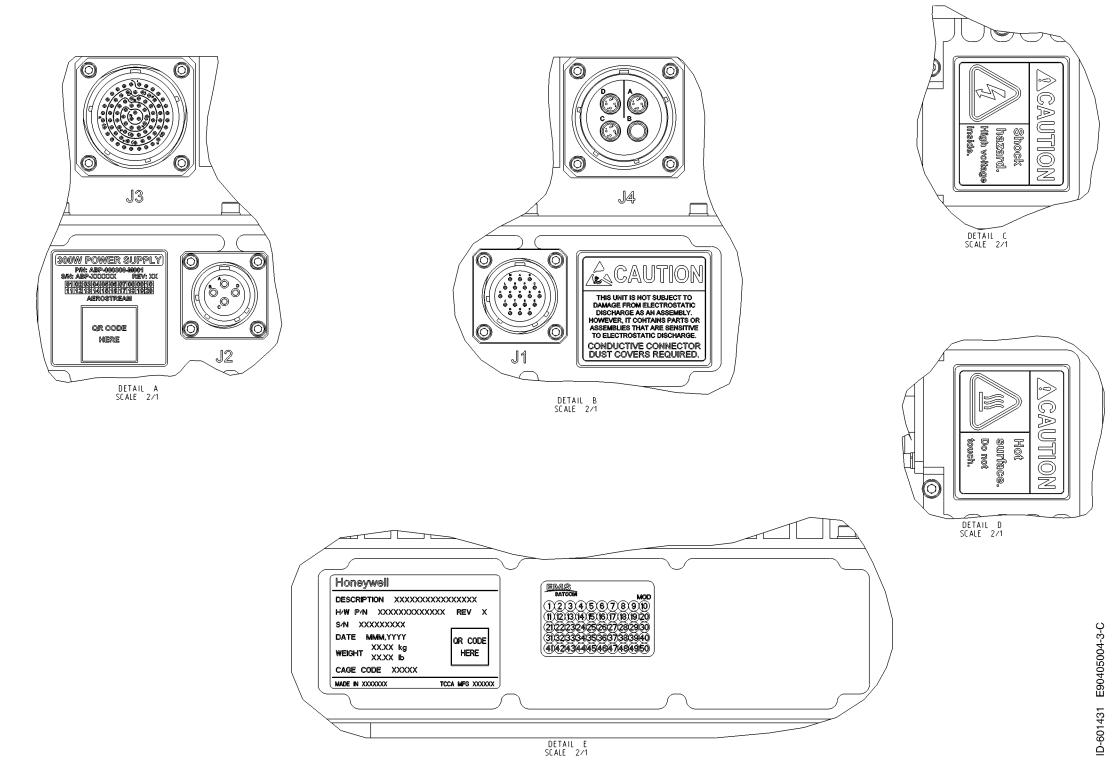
(Sheet 3 of 3) KANDU Variant 2 Outline and Installation Drawing (90405004, REV C)
